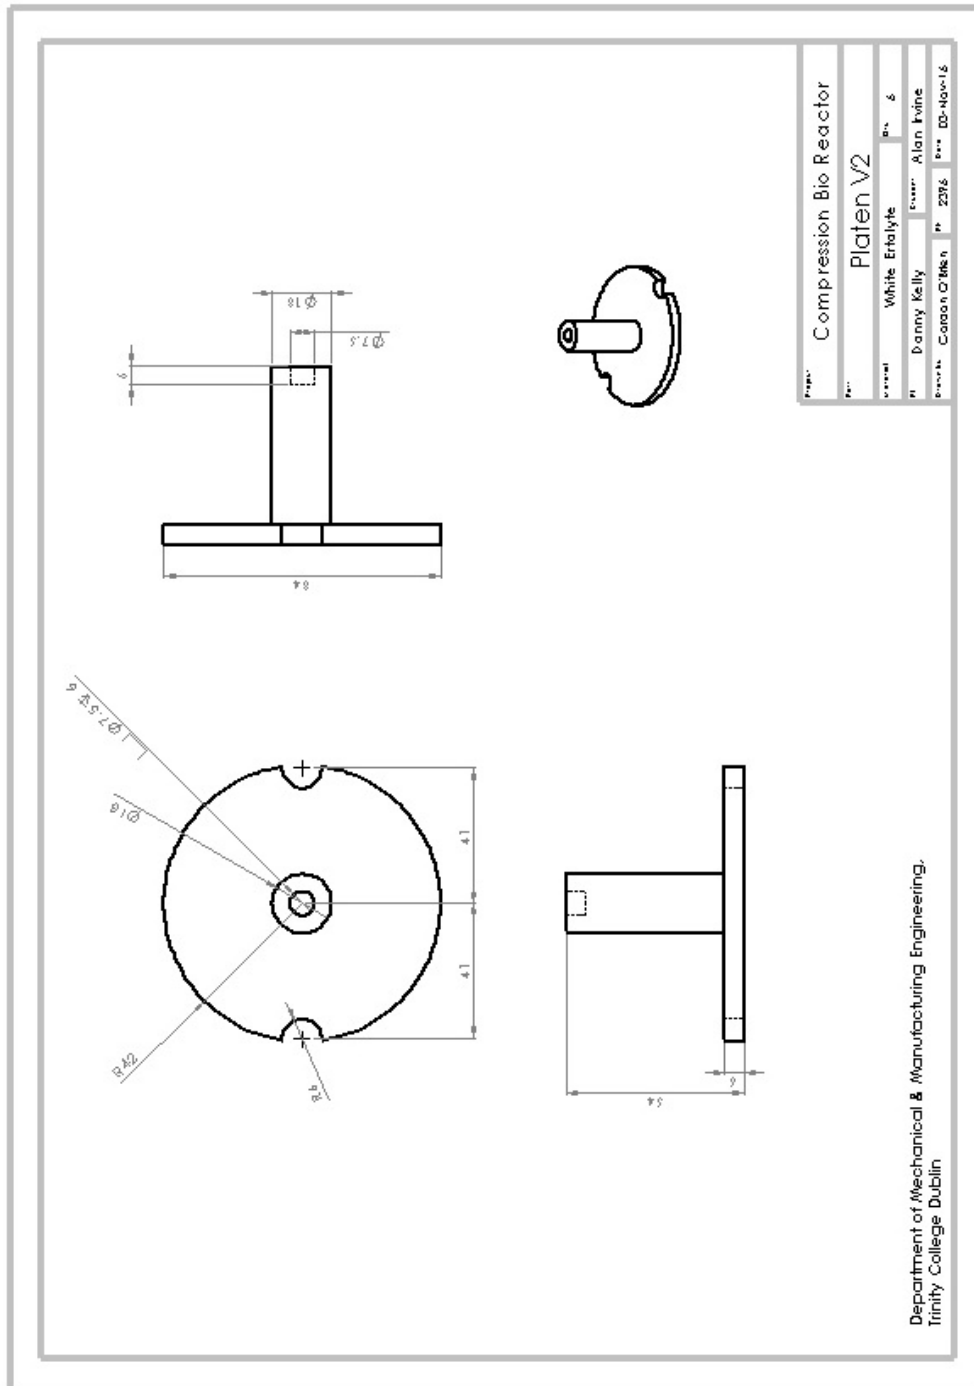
Technical drawings for the compressing platen that was magnetically coupled to the actuator-load cell assembly.
